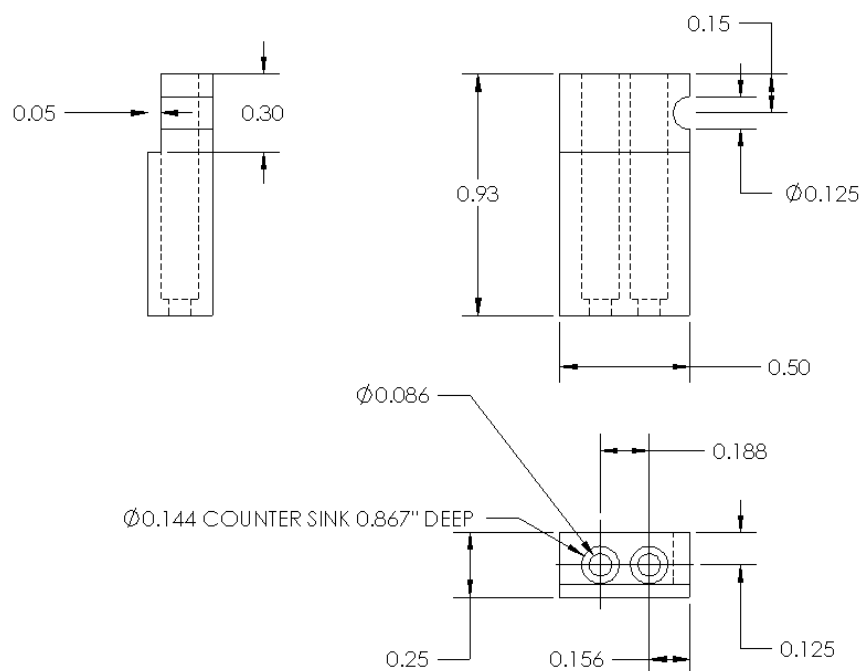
Dimensions of the first of two outer attachment blocks of the shear strain extensometer. All dimensions are in inches.
